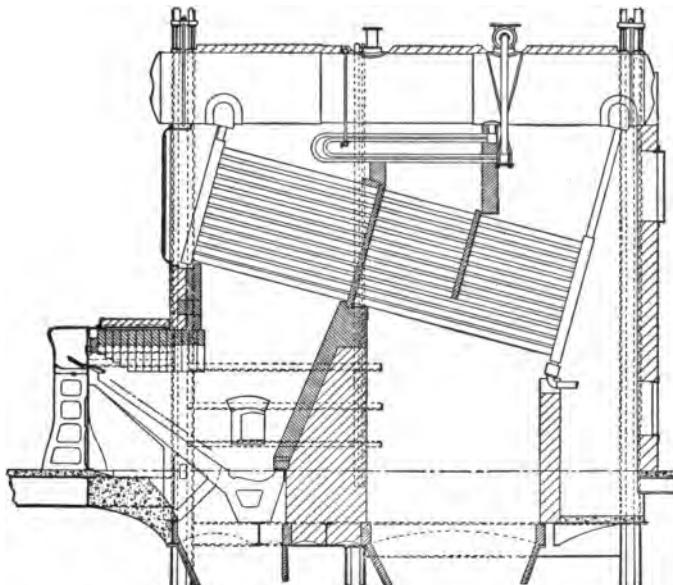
Overfeed Stoker Applied to B. & W. Boiler, Showing Extension of Furnace in Front of Boiler.
